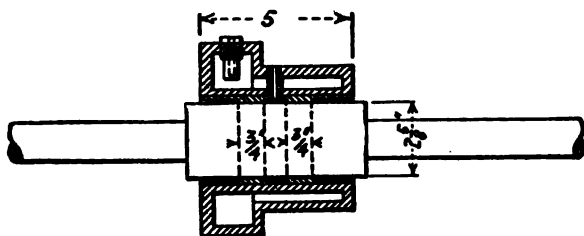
SEC. 6.—Bearing of testing machine shown in Fig. 39, Sec. 6.
